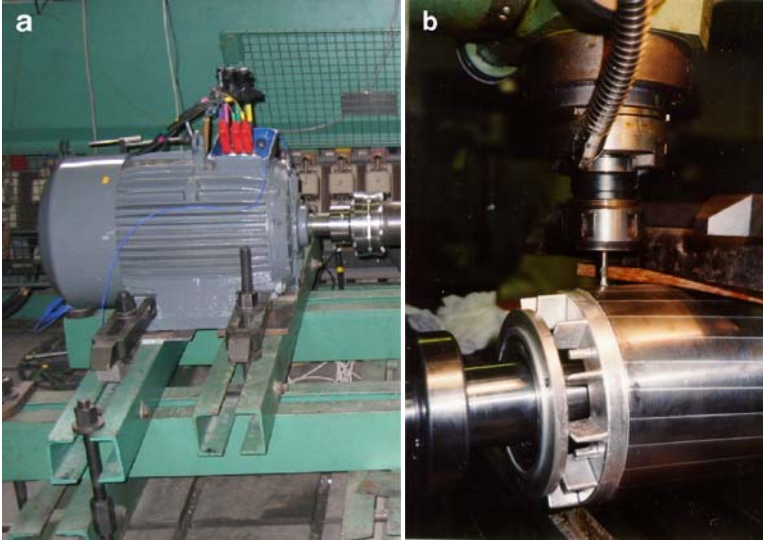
(a) 18.5 kW four pole induction machine in the lab, (b) drilling a hole into the aluminum part of the squirrel cage rotor
